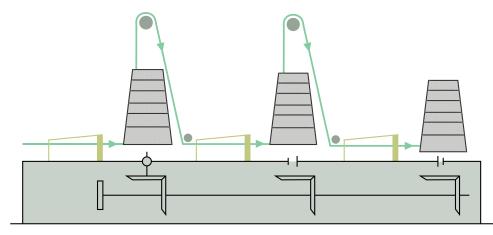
Scheme of a tandem drawing machine Adapted from http://www.idc-online.com/technical_references/pdfs/mechanical_engineering/Wire_and_bar_drawing.pdf
